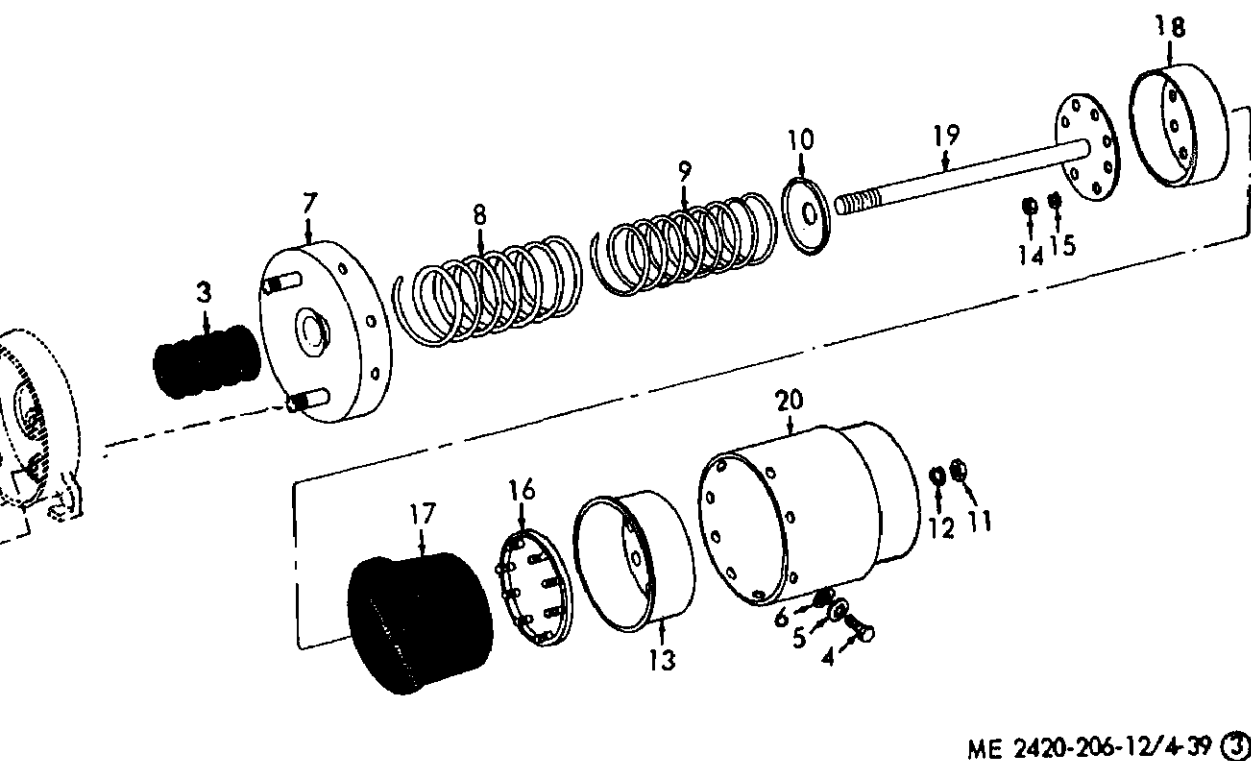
Brake actuator and hydraulic tank, removal, disassembly, reassembly and installation (sheet 2 of 3).
